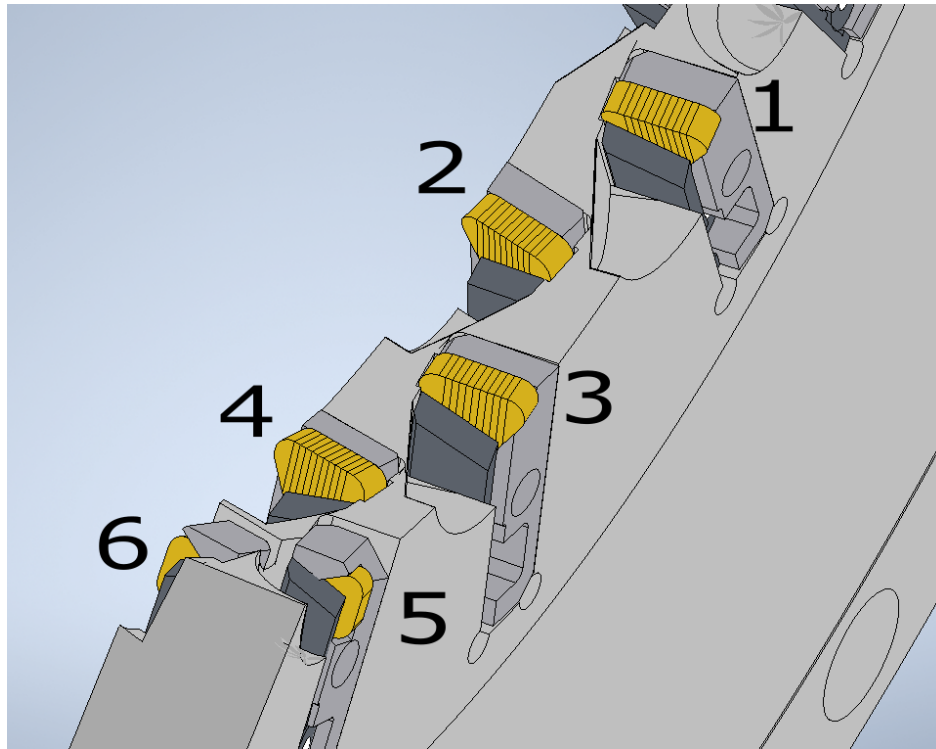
Two sets of cassettes from the both sides of the body of the internal disc milling cutter: 1;3;5, and 2;4;6, where 1,2,3 and 4 - E-type cutting inserts (27.A58 and 27.A59) shaping the cylindrical surface of the crankpin; 5 and 6 - S-type cutting inserts (27.A62 and 27.A66) shaping the transition radius and web of the crank
